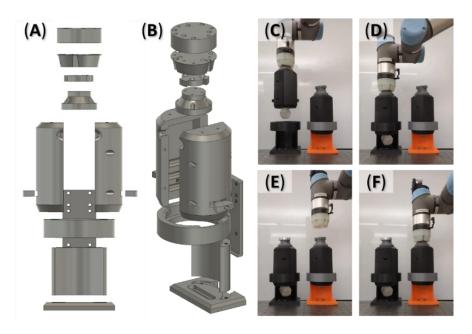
Overview of the Modular Design ultrasound probe holder. Engineering diagram of the Modular Design in (A) front and (B) oblique exploded view. (C-F) The design can swap between linear and curvilinear transducer housed in docking stations.
